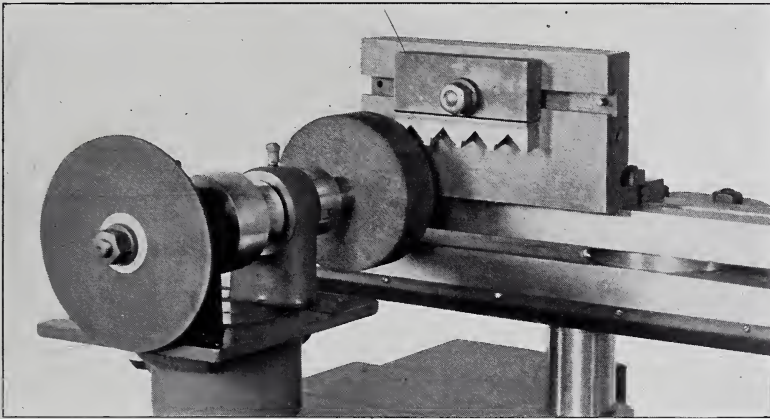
SHARPENING FLAT-FORMED TOOLS BY GRINDING ACROSS THE FACE
